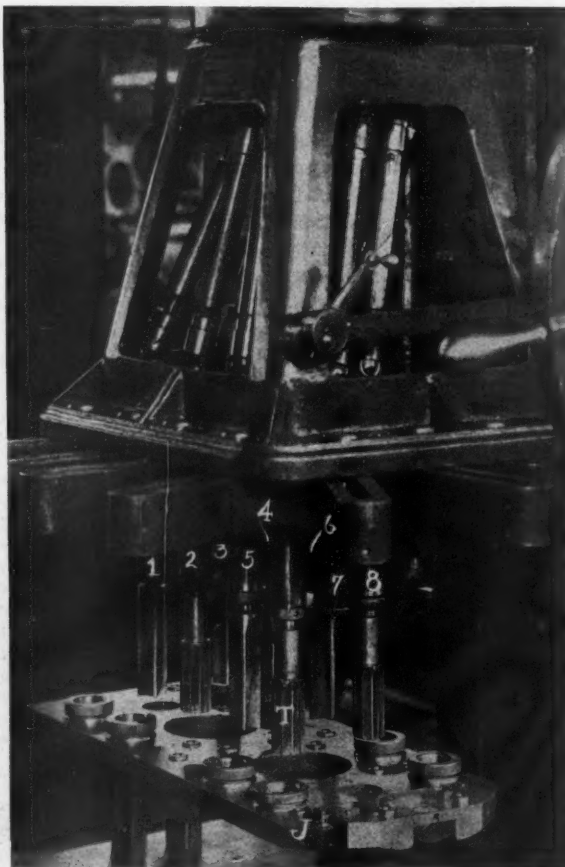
MULTIPLE-SPINDLE DRILL WITH EIGHT SPINDLES
